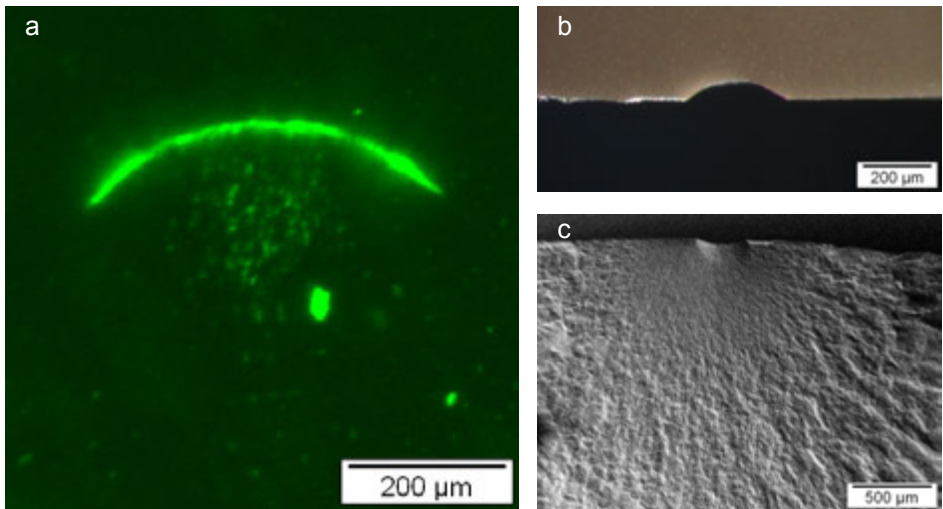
C contact damage crack in a silicon nitride ball. (a) shows the outer surface and the crack highlighted by fluorescent dye penetrant. (b) shows one half of the notched ball after it was broken. (c) shows the fracture surface. (Courtesy T. Lube and R. Danzer, Mountain University Leoben).
